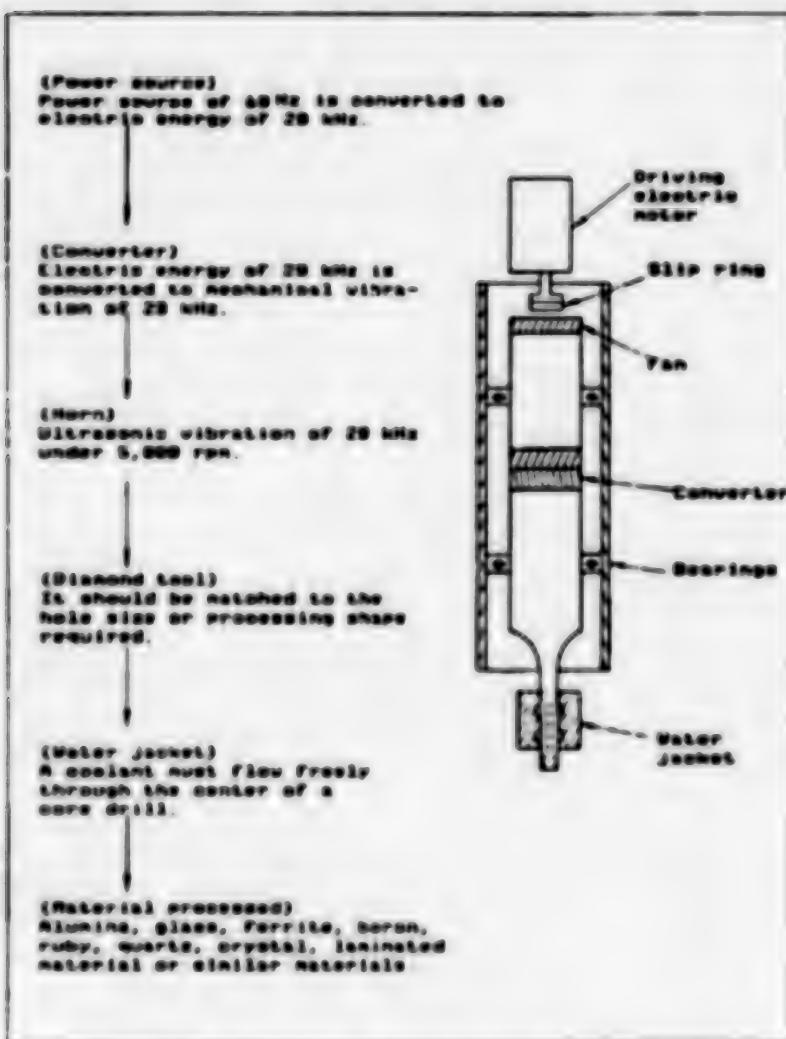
Processing Principle of Ultrasonic Processing Machine Made by Branson
